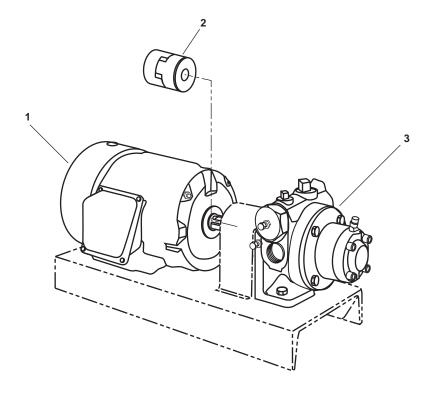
Lube Oil Transfer Pump (Sheet 1 of 2)
